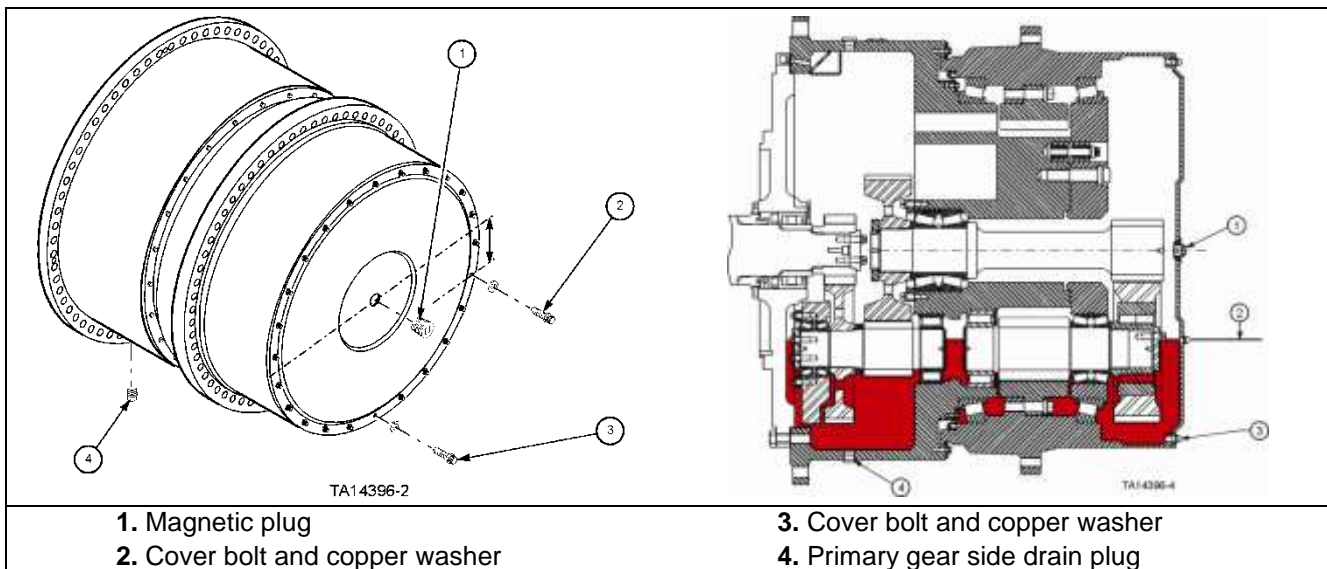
Oil servicing points and oil level - 51A2 planetary drive early production machines
